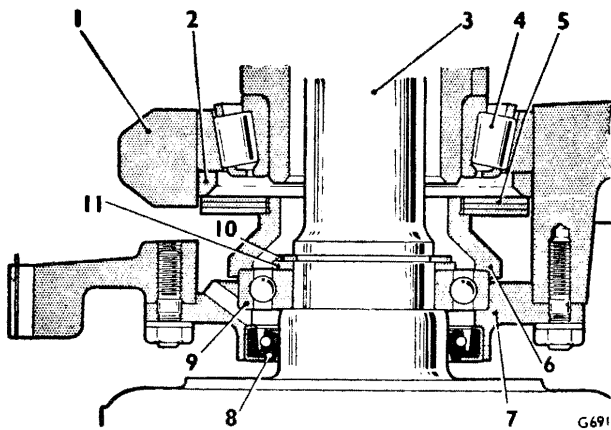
CROSS-SECTION—FINAL DRIVE SIDE HOUSING
